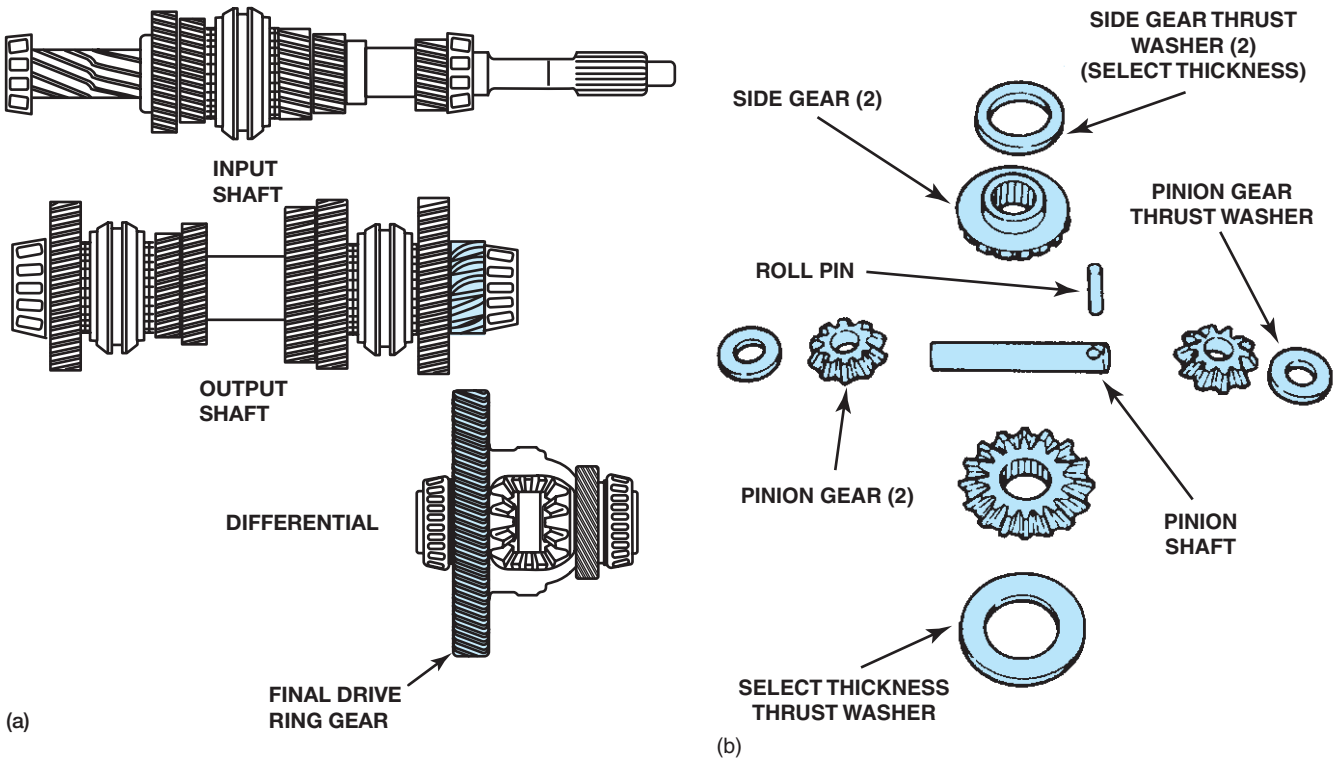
The final drive pinion gear drives the ring gear mounted on the differential case (a). This is an exploded view of the differential and its parts (b). (b is Courtesy of DaimlerChrysler Corporation)
